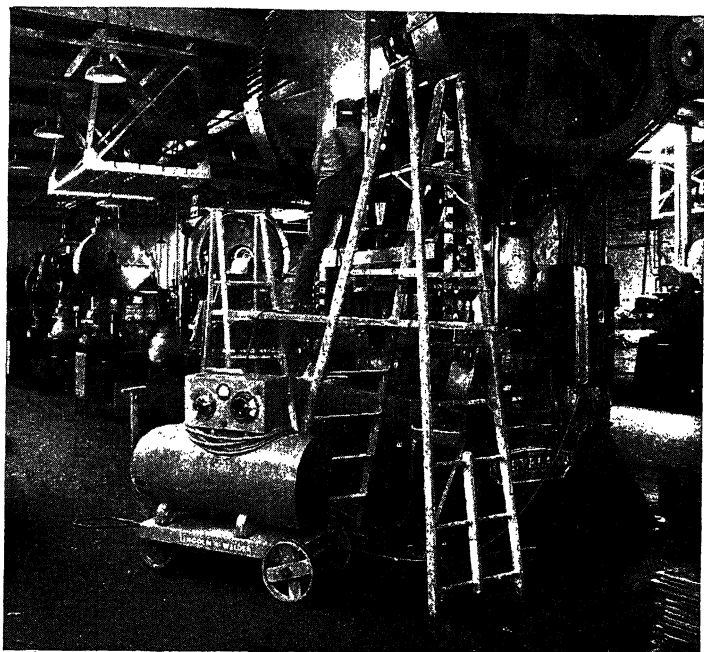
Welding cast-iron gear. (Courtesy of Lincoln Electric Co.)
